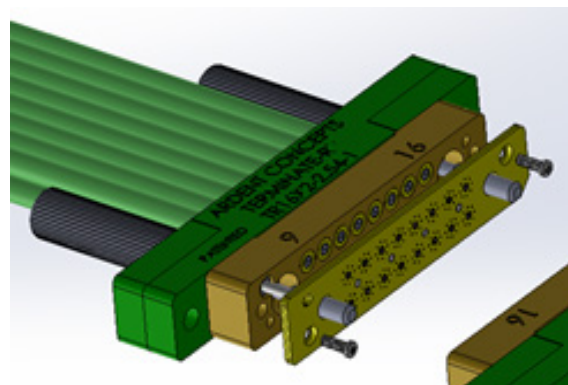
TR interface design using Ardent Concepts' patented RC spring probe solderless compliant pin technology
